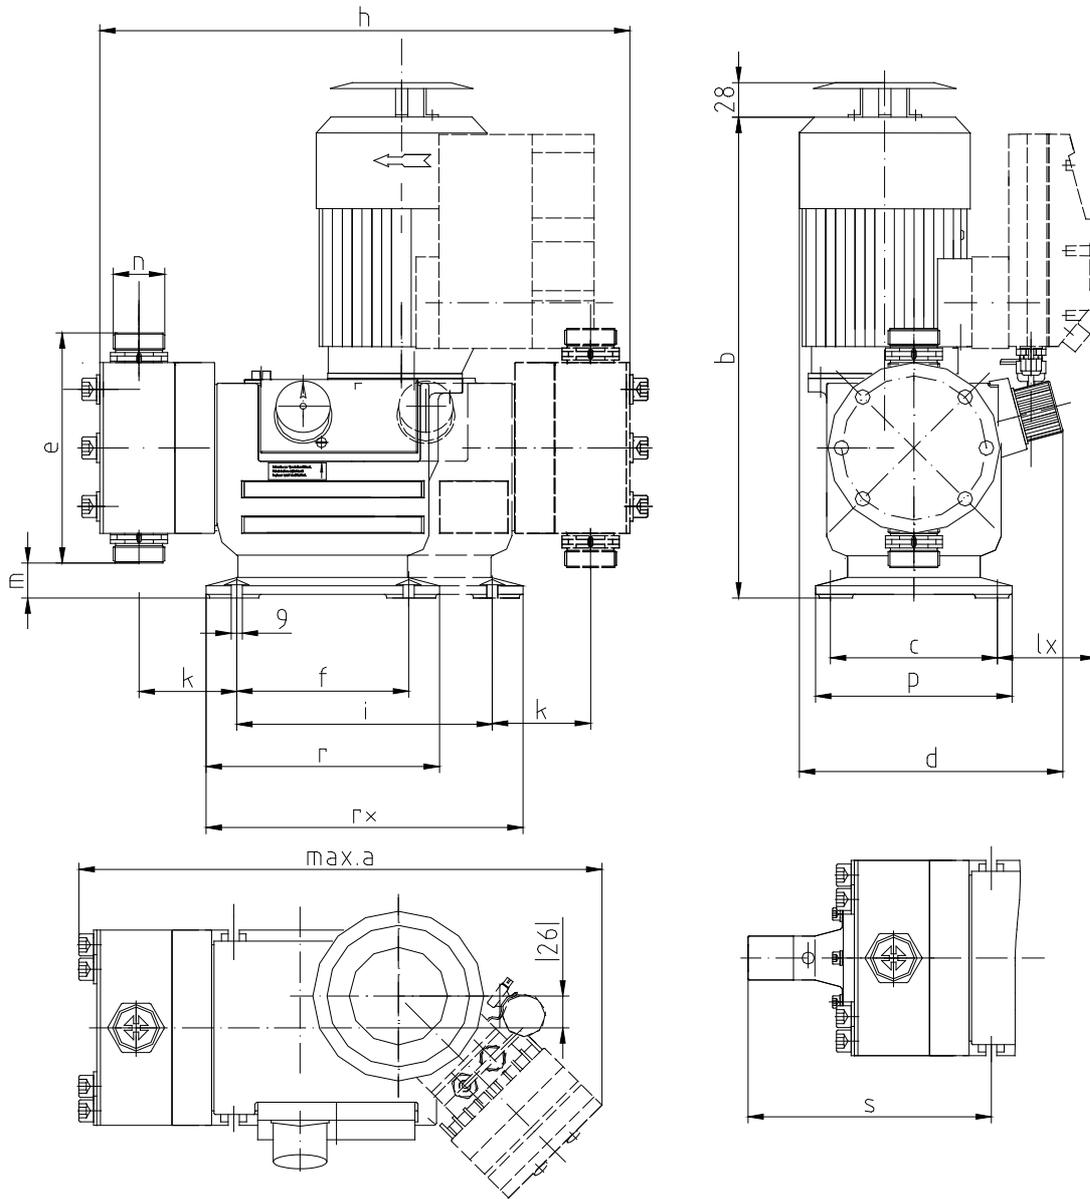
Dimensional sketches of DMX 226 (part 2)
